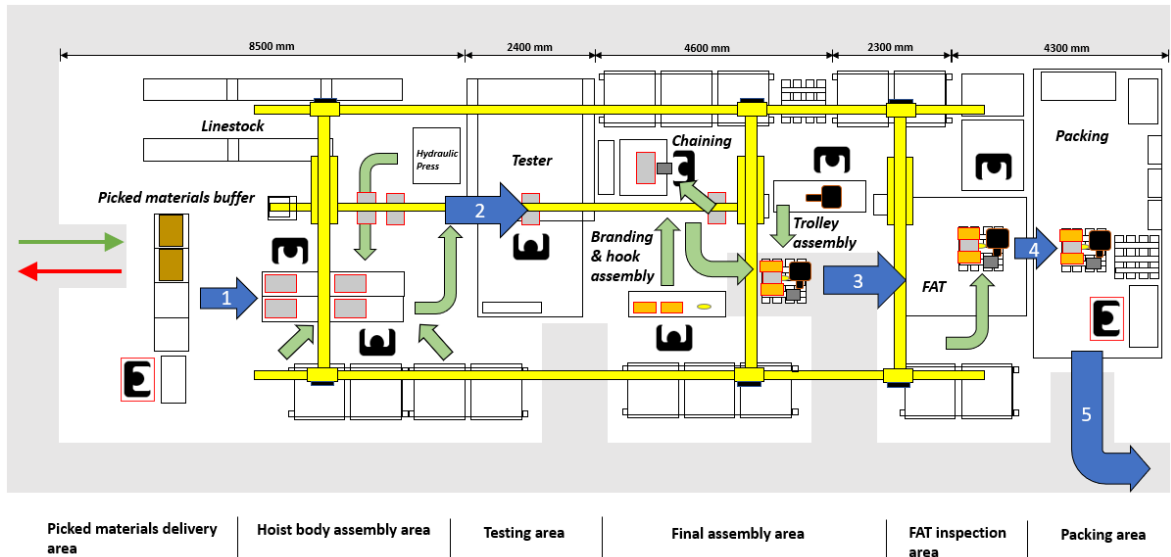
Blank paper scenario #1 assembly area layout (CTO hoists)
